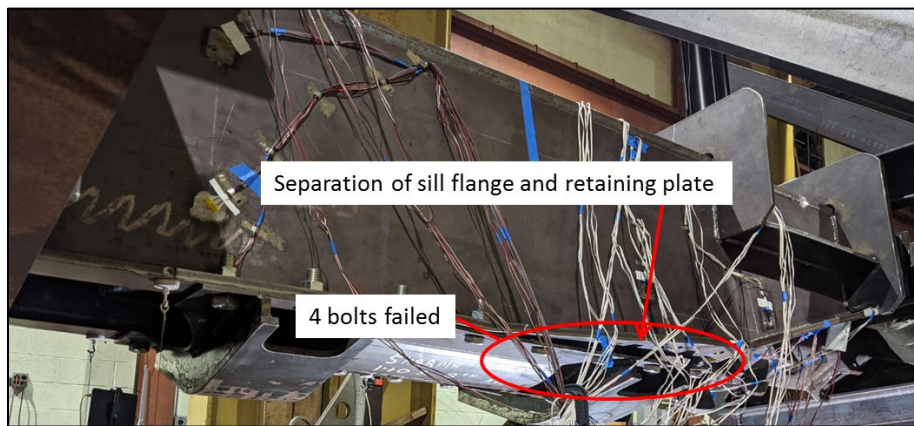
Draft Sill and Bolt Failure – View 1
